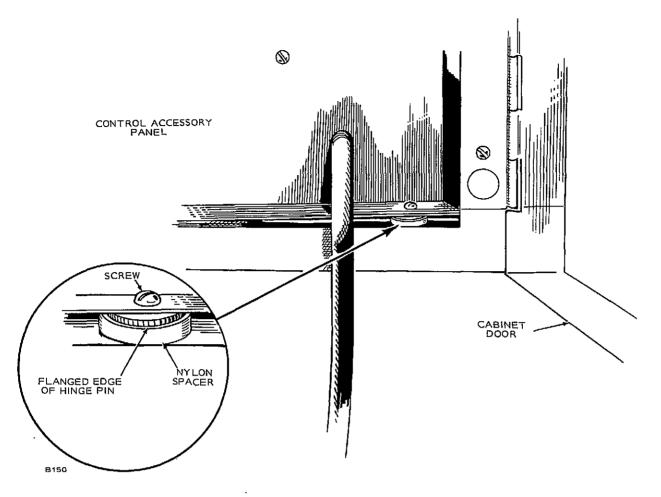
BOTTOM HINGE PIN FOR CONTROL ACCESSORY PANEL
